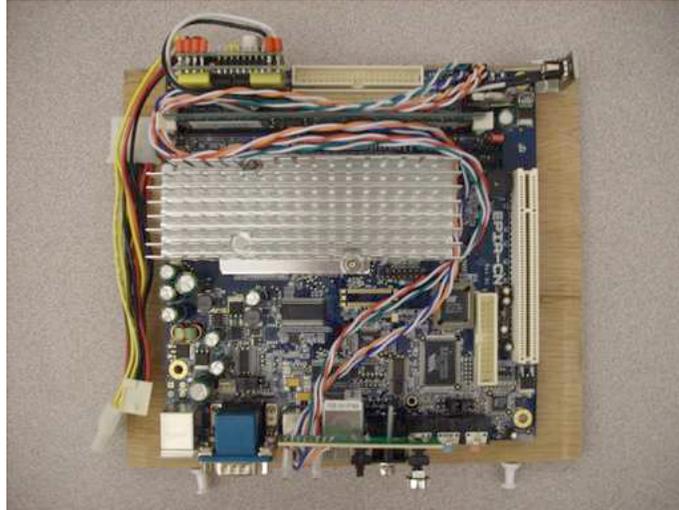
Overhead view showing the routing of the power switch cables to the header pins located in the upper right-hand corner of the board near the 12VDC input connector.
